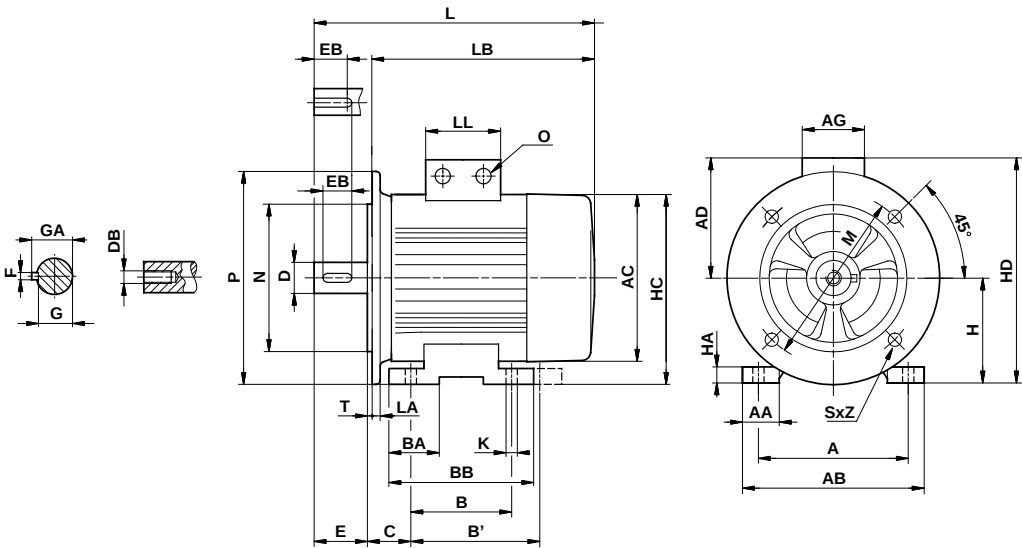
Foot-mounted motor with free-hole flange, IM B 35
